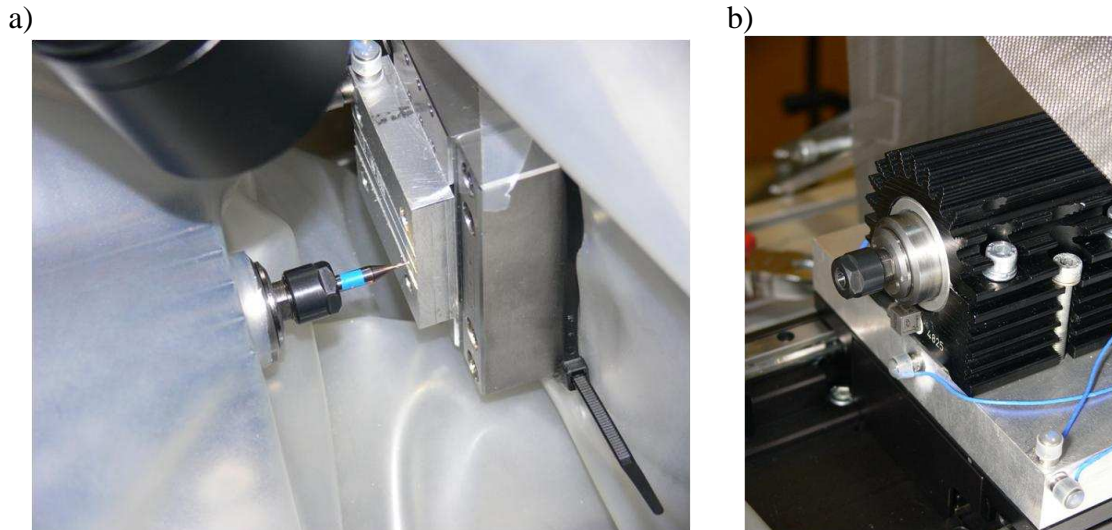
Micro-milling machine: a) workpiece and accelerometers attached to the workpiece, b) machine spindle and accelerometers attached to the spindle
